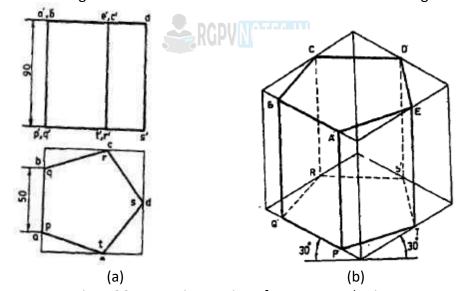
Isometric Drawing of a Pentagonal Prism
